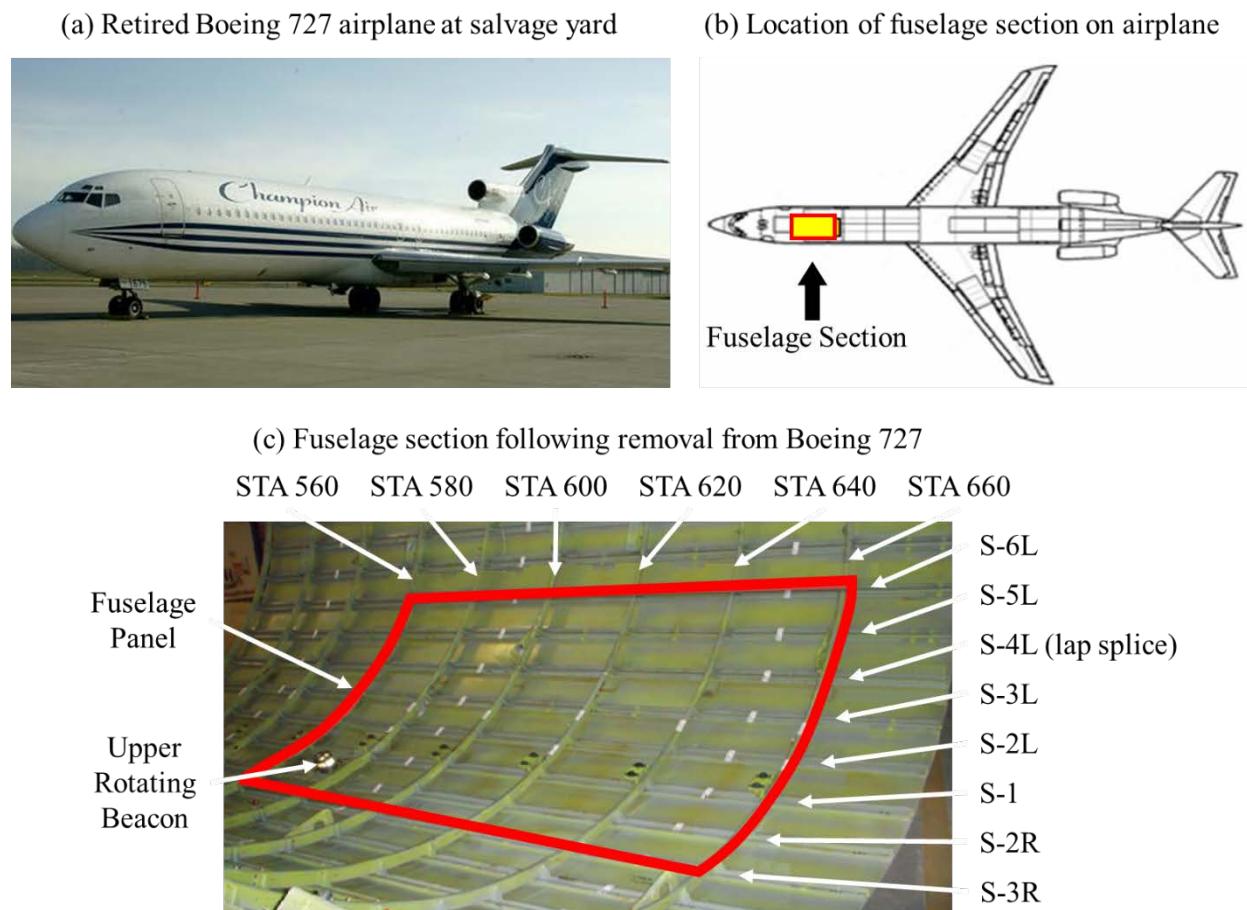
Highlights of B727 airplane and panel: (a) retired airplane in salvage yard, (b) location of panel section on airplane, and (c) internal view of removed panel section
